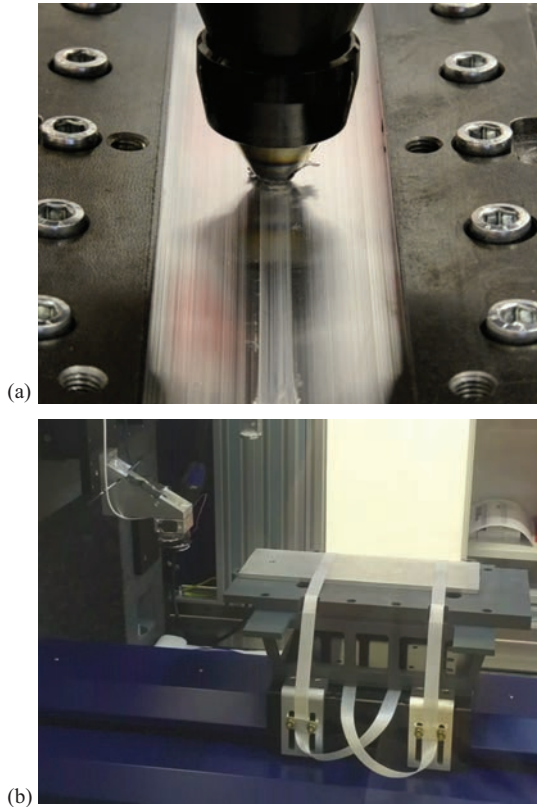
(a) FSW of the Al-specimen. (b) MIECT measurement of the FSW specimen on MMP-15
